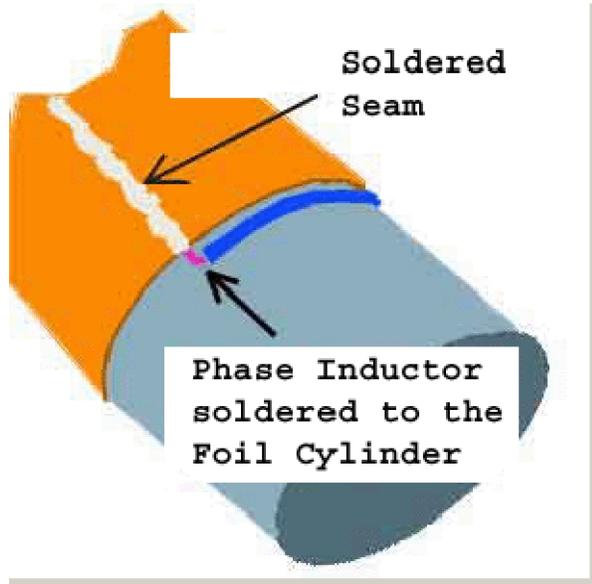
Soldering of the Inductor to the Upper Copper Cylinder
